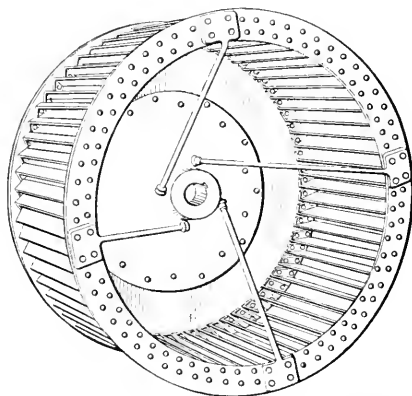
SIROCCO WHEEL—TURBINE TYPE IMPELLER.
